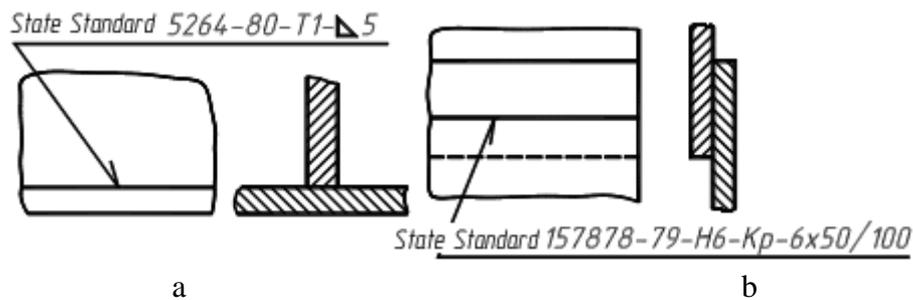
The example of T-Joint (a) and interrupted lap welded joint(b)
